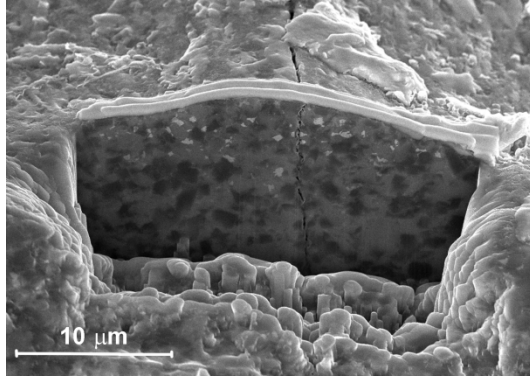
FIB milling of the crack on the crater of UCBN tool ($v_c=300$ m/min, $f=0.2$ mm/rev)
